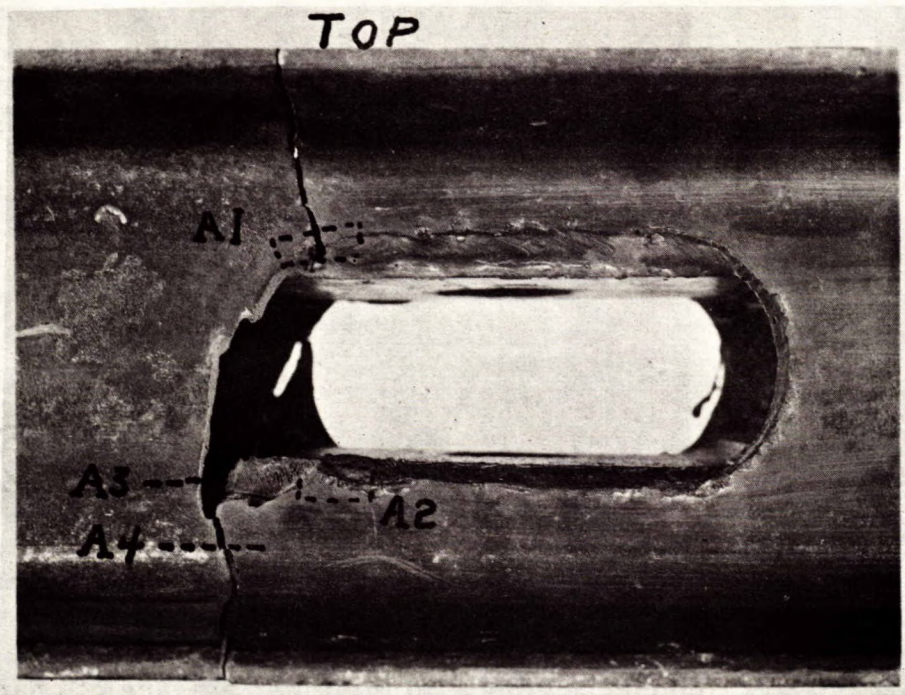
Side view looking at channel A with top side of channel at top of picture. The lower fracture followed a path similar to that in channel B, but in addition a secondary fracture ran from close to the edge of the starting point of the lower weld out to the main fracture. Thus, a triangular shaped piece of metal from the web is missing. The upper fracture travels along the edge of the weld crater at the termination of the outer fillet weld and then almost straight upward through the channel web and flange.
